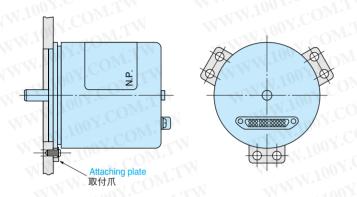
Standard Way for attaching Encoder 図-6 エンコーダの標準取付方法
